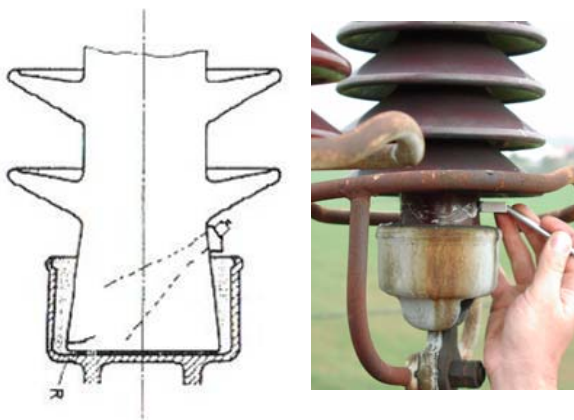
Schema of the using ultrasonic probe to detect transversal crack at head of the insulator and practical testing by angle beam probe
